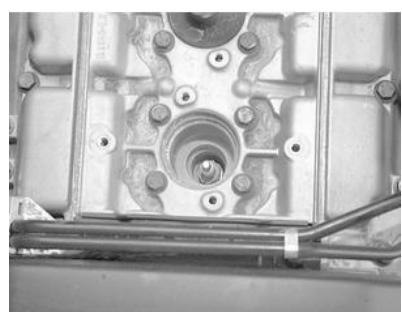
Typically, the spark plugs are removed using a $\frac{5}{8}$ inch spark plug socket
